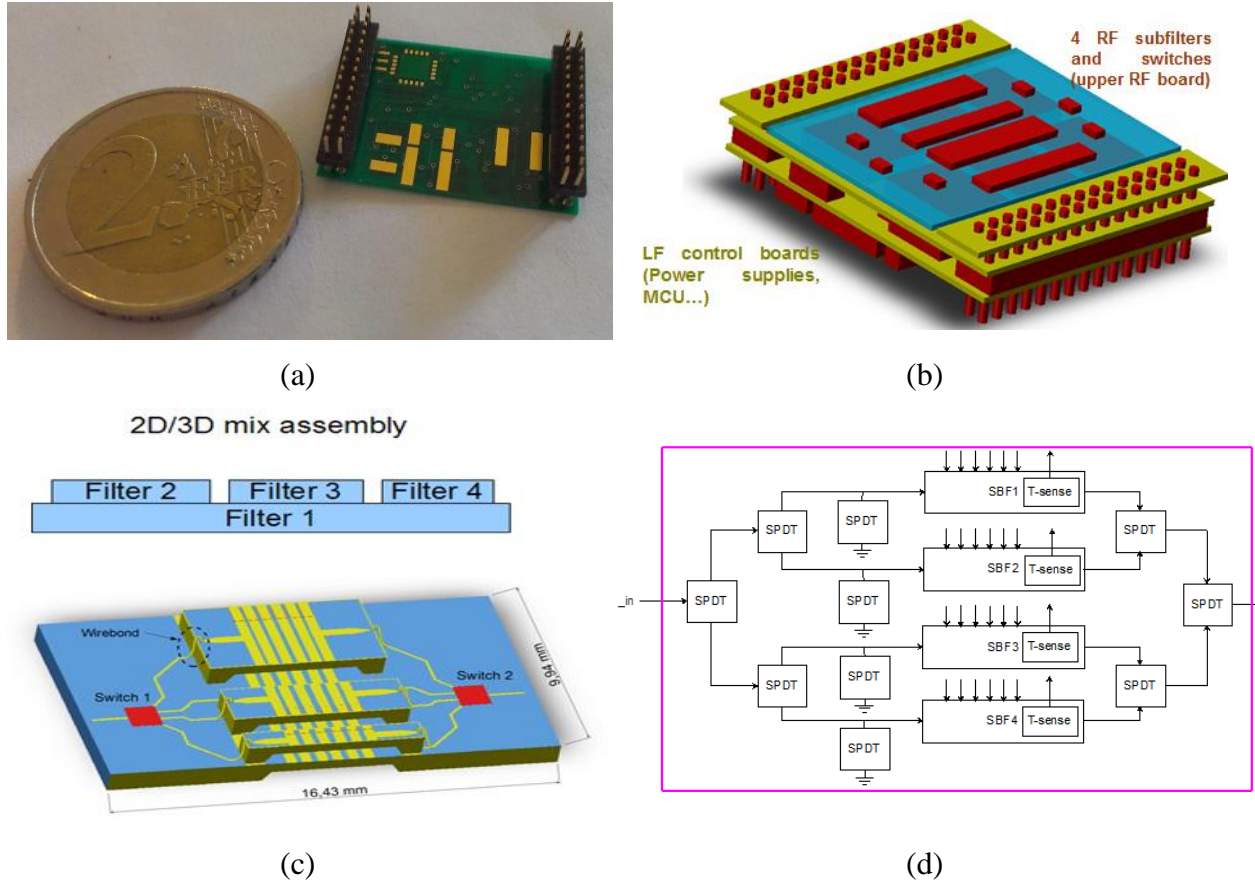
Smart microwave agile filter demonstrator. (a) A prototype of the demonstrator package. (b) A 3D package design. (c) RF part (four tunable sub-filters and two switch blocks) assembly. (d) RF part schematic.
